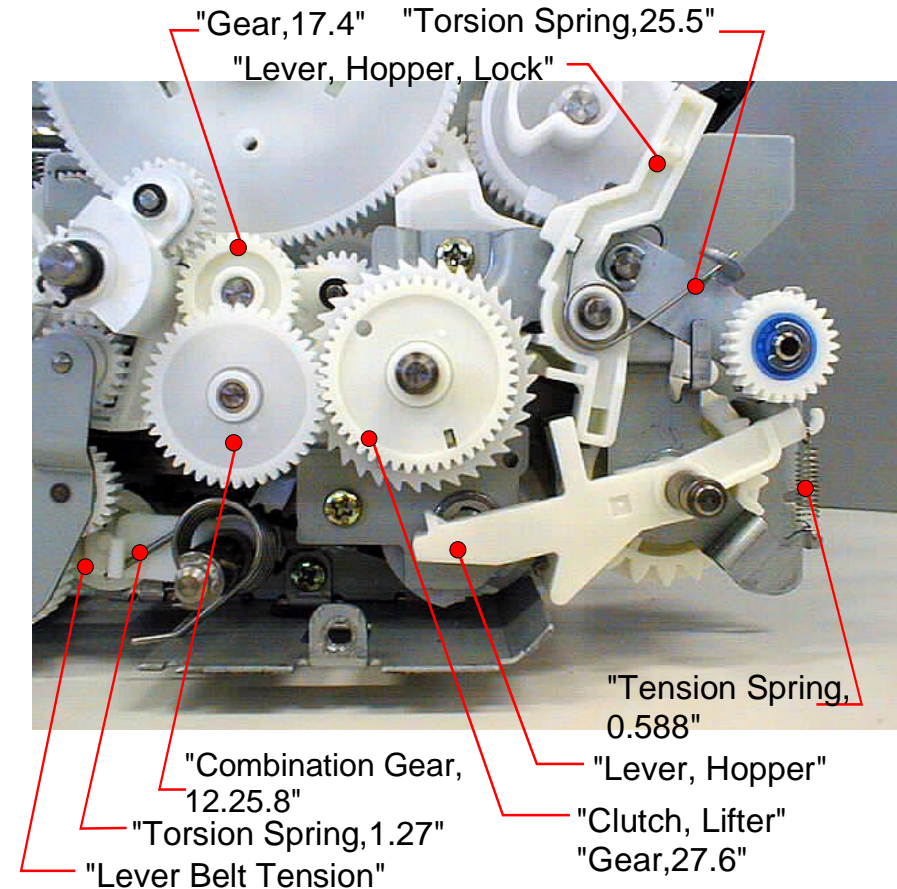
Installing the rest parts of "Frame Assembly, Middle, Right"(1)
